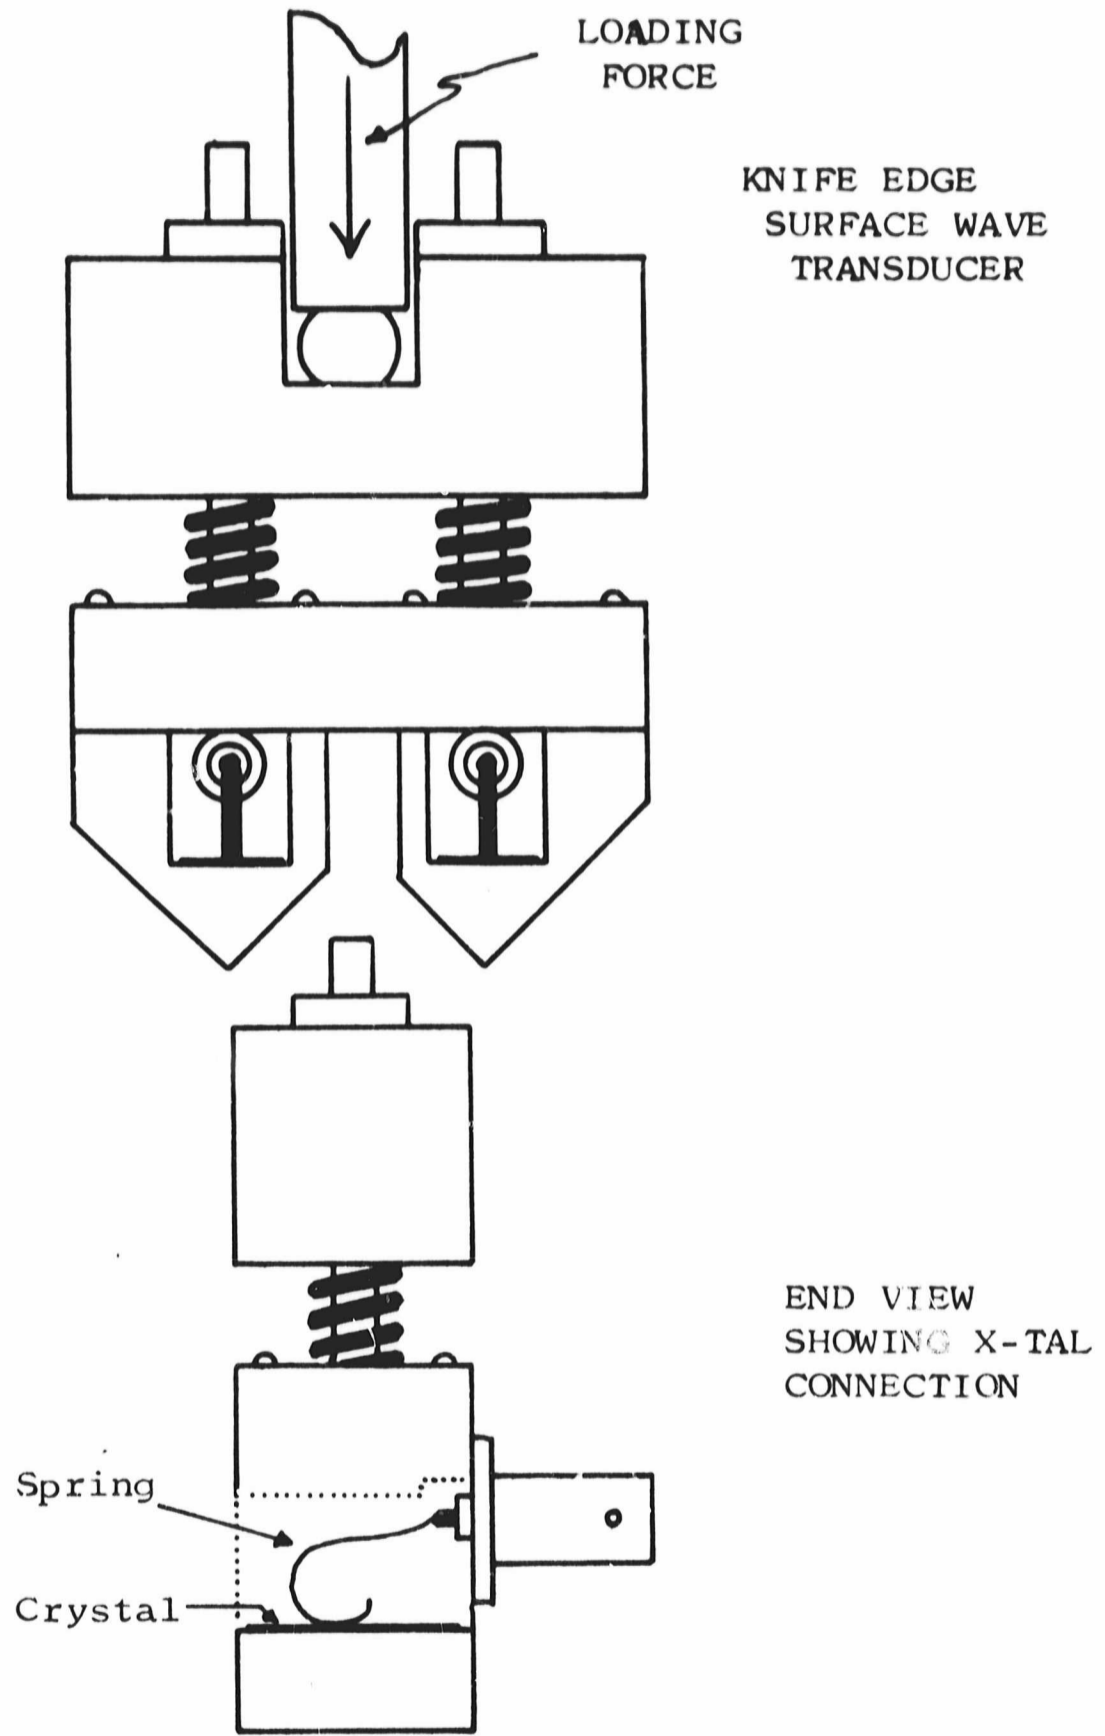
Configuration of the Knife Edge Surface Wave Transducer Assembly.
